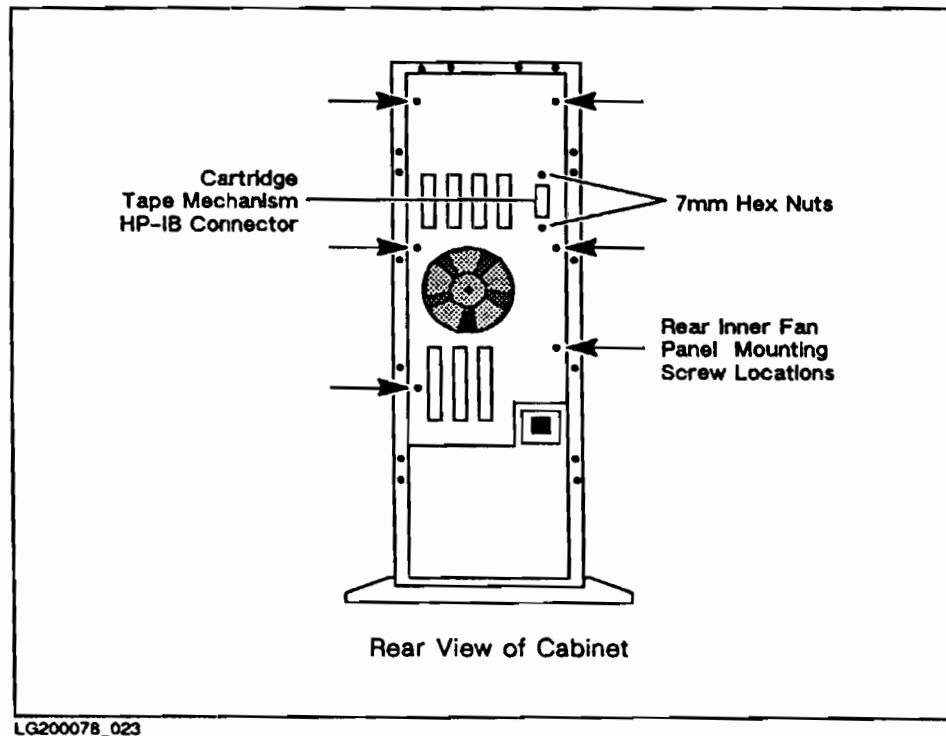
Rear Inner Cover/Fan Assembly Removal
